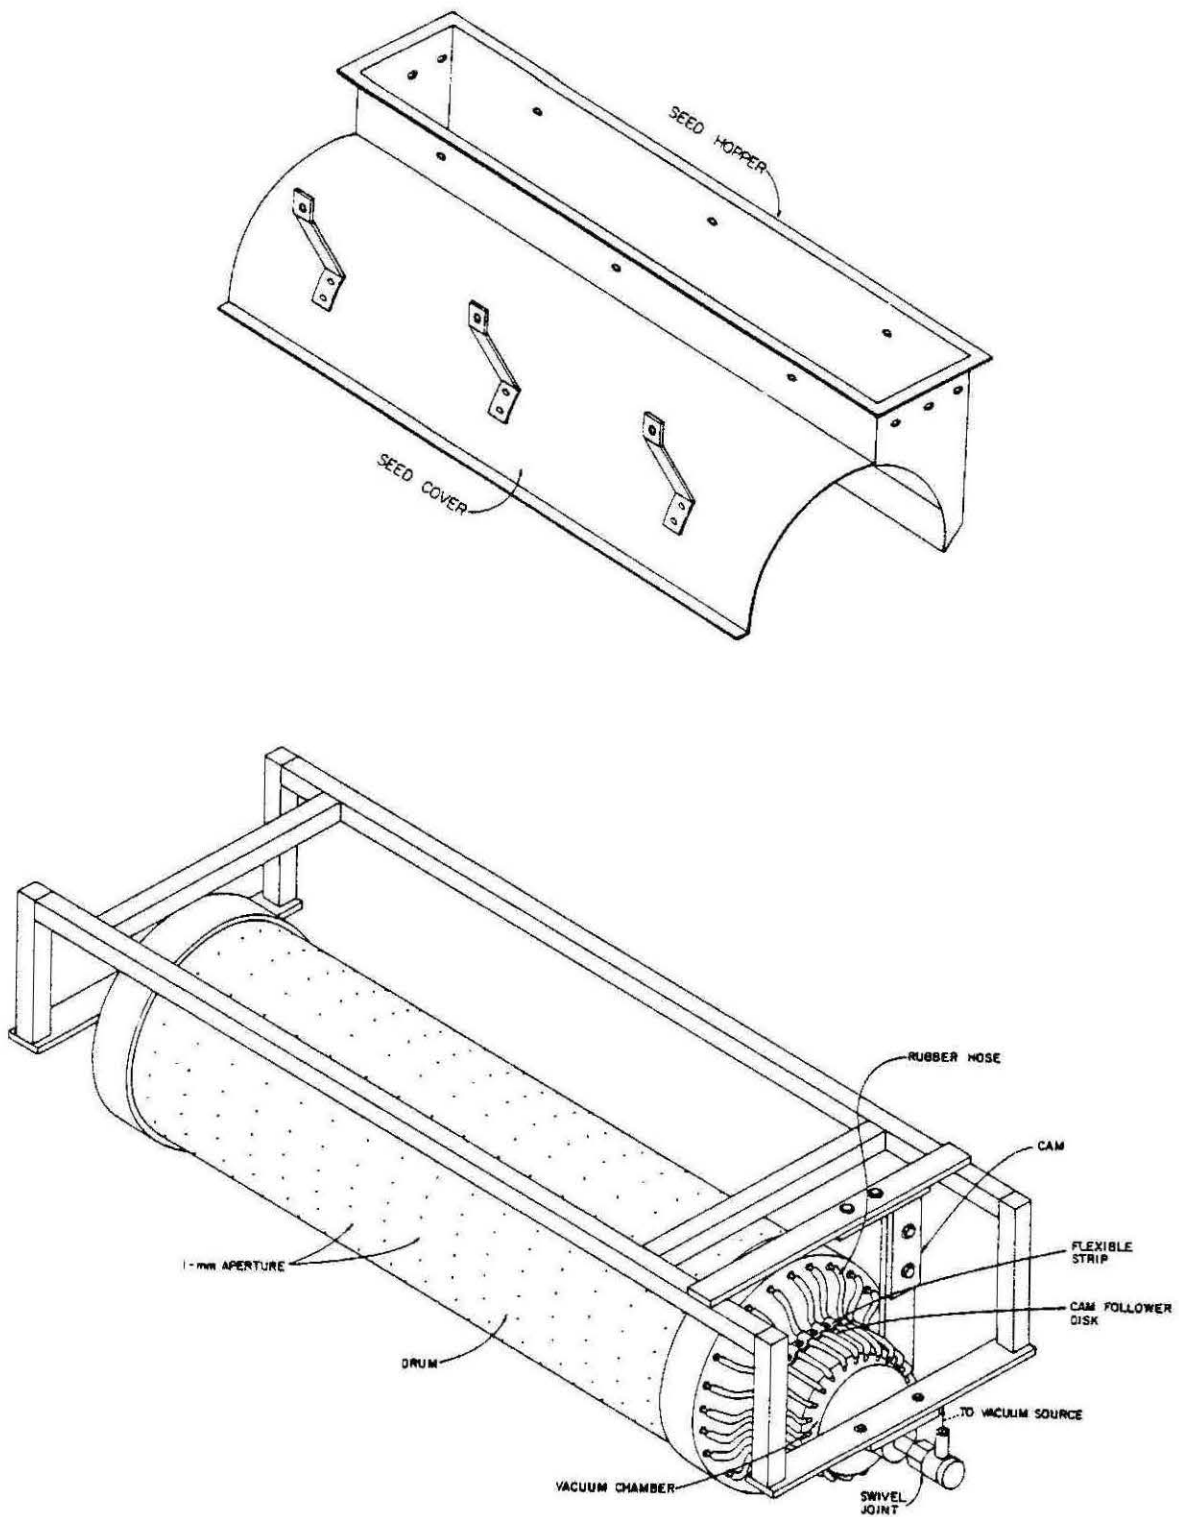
Three dimensional view of the vacuum drum seeder showing detailed design of the seed hopper (top) and vacuum chamber, cam mounting, rubber hose attachment, and drum seeder.
